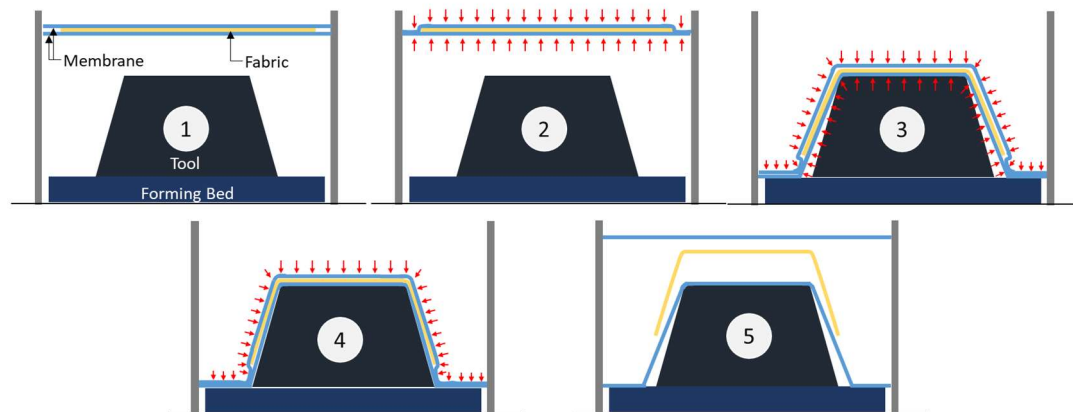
Double diaphragm forming schematic stages. 1. Fabric is placed between the two membranes, 2. Vacuum is drawn between the membrane. 3. Vacuum is drawn between the tooling and lower membrane. 5. Diaphragm lowers over the tooling. 6. The part is cured and finally removed
